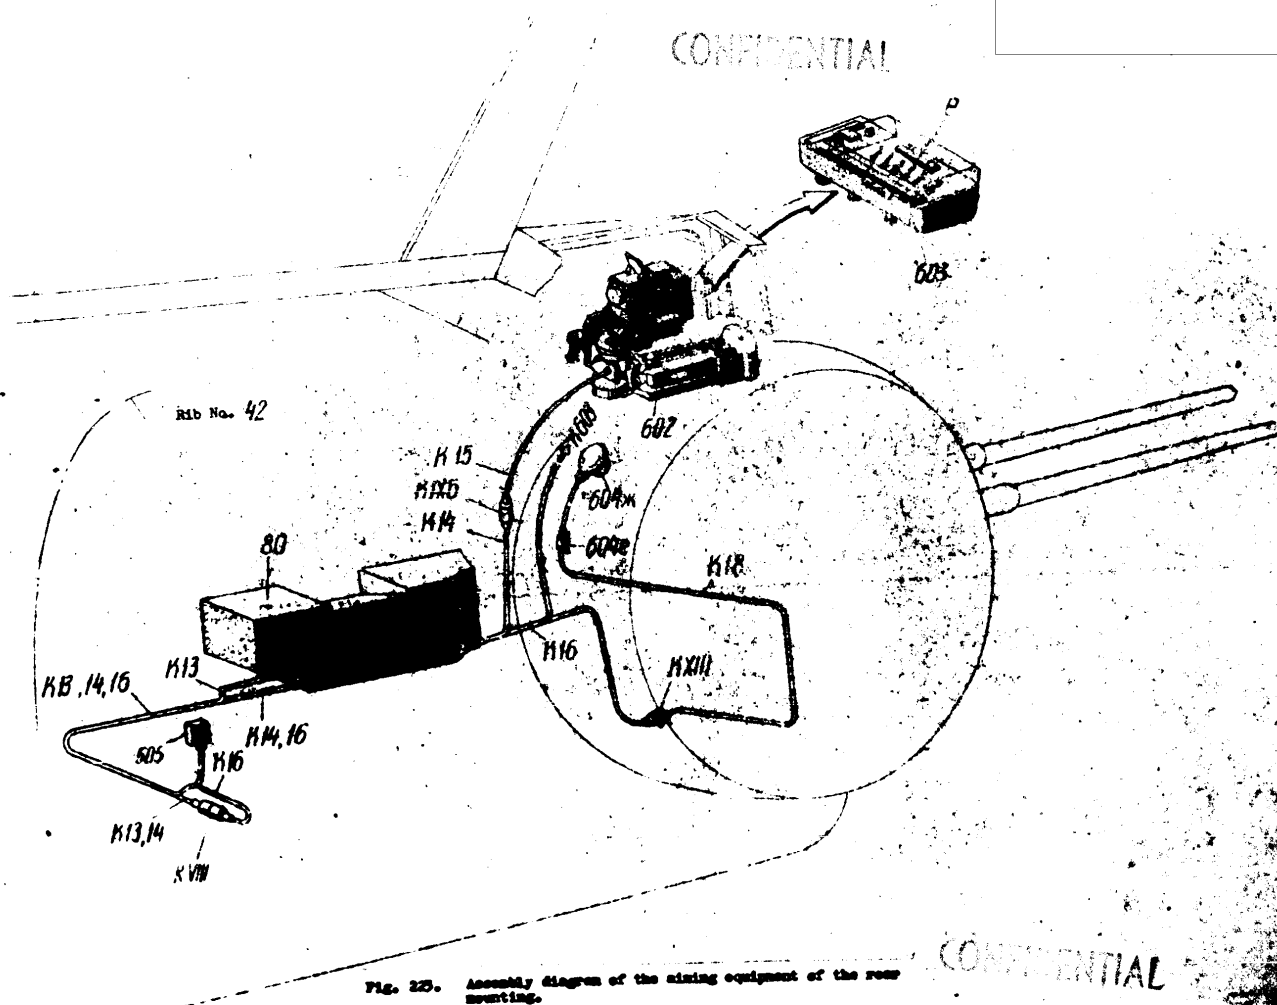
Principal and assembly diagram of the aiming equipment of the rear mounting.
